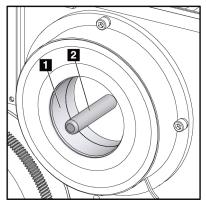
Lubricating the Shaft and Inner Anti-Backlash Gear
